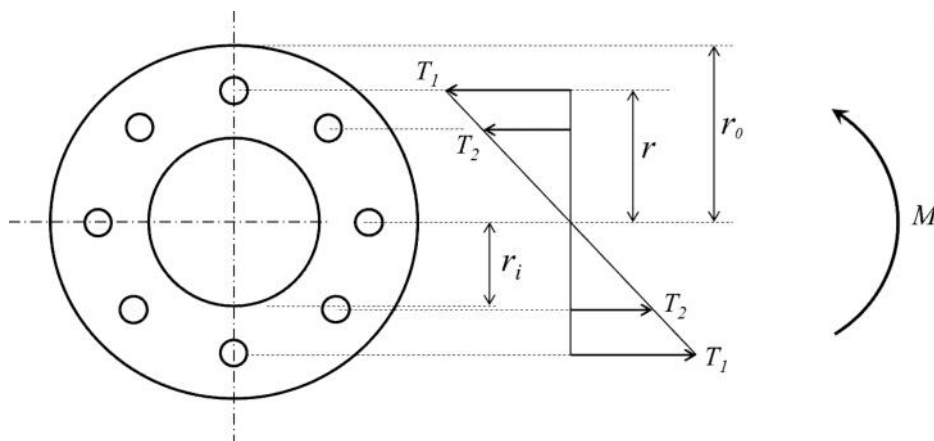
Plan and force distribution of a typical flanged pipe joint with 8 bolts
